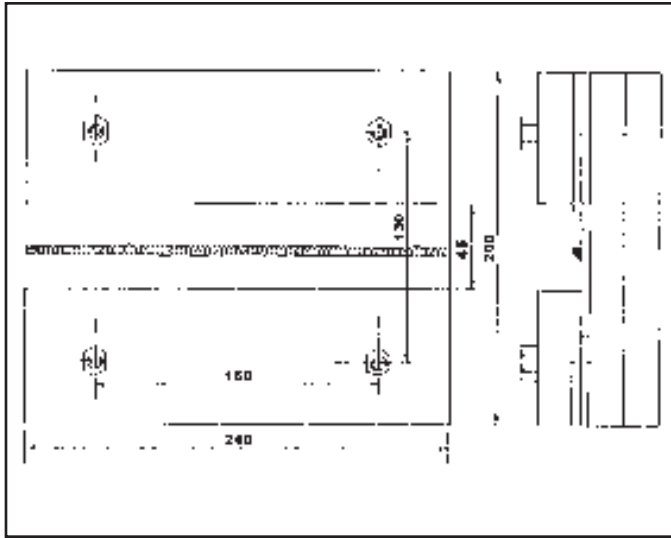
Constraining tool for welding of lap joints.
